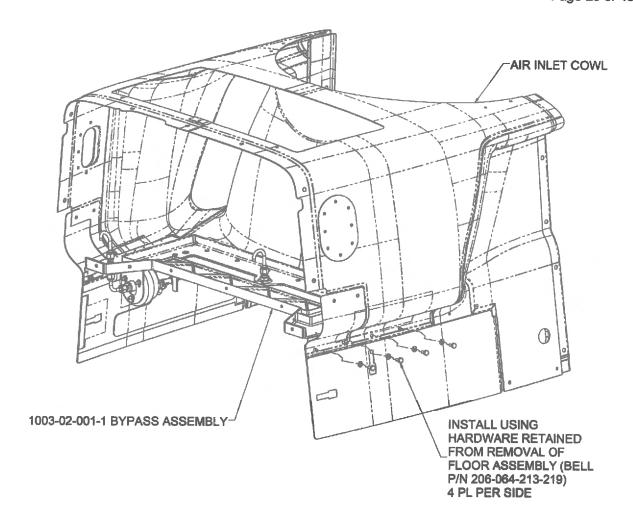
1003-02-001-1 Bypass Assembly Removal/Installation
